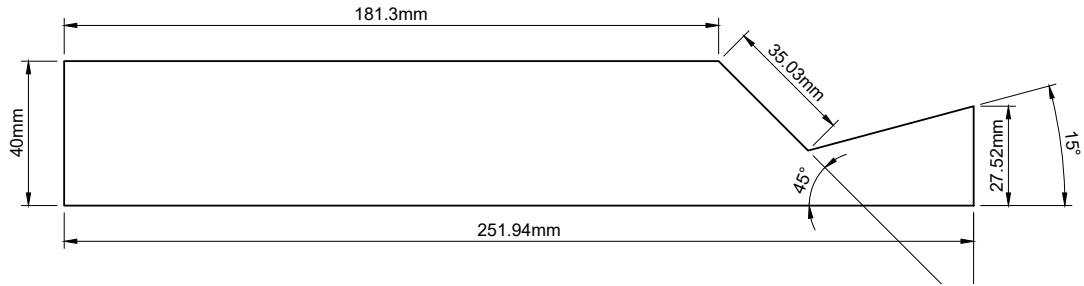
Aphlex 1B drawing with a conical nozzle and given dimensions.
